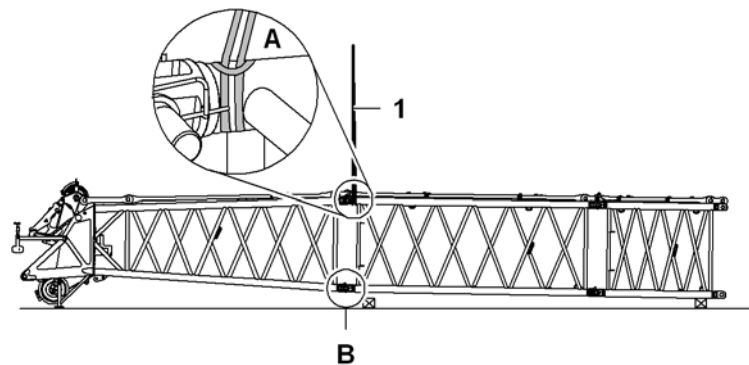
Bolting the boom head section to the boom sections at the bottom
